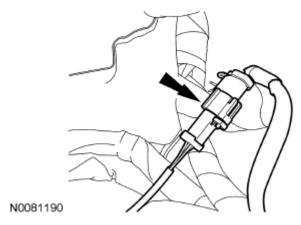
Locating Nut And Generator Wiring Harness Courtesy of FORD MOTOR CO.
